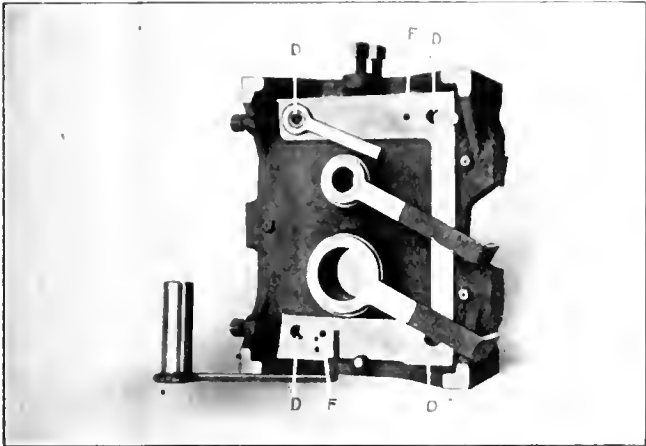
Rear View of Drill Jig shown in Fig. 73.
